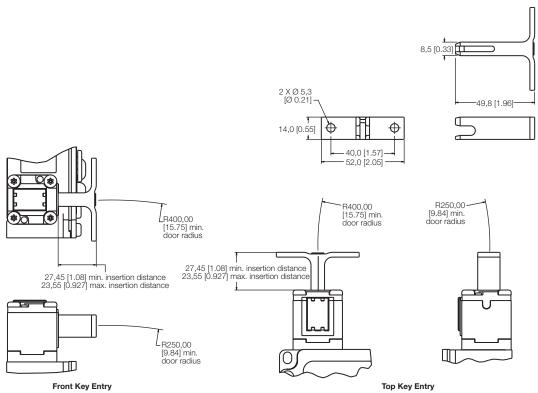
GKL/R Key Code 8 Dimensions mm [in]
